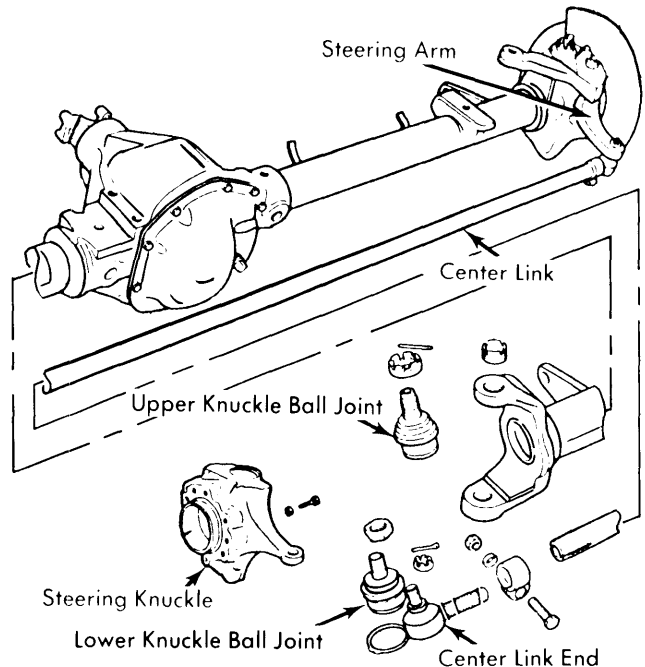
4WD Steering Linkage Assembly (W100 is Model Shown)
